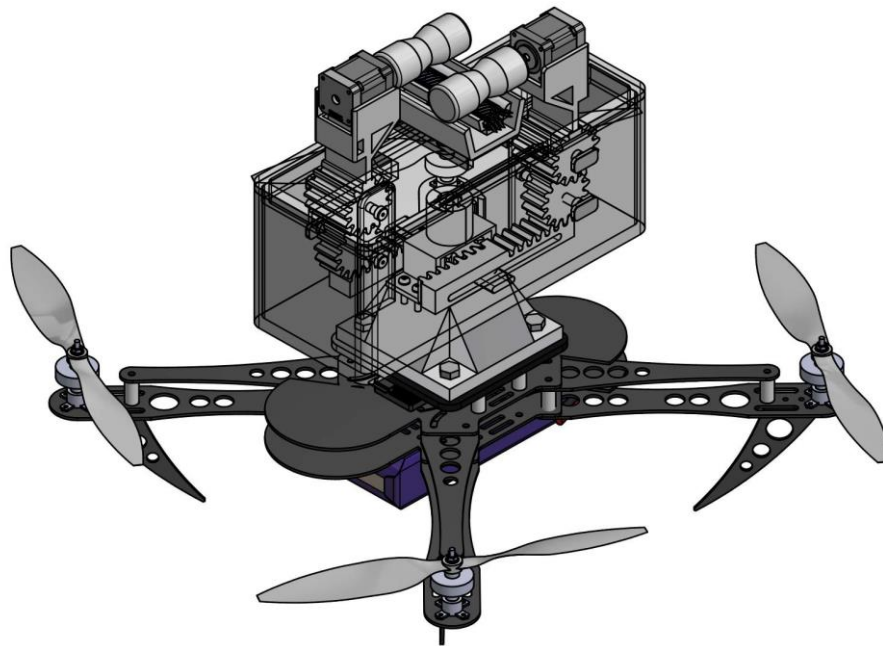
CAD of Final Assembly Mounted on the Deployment Drone
